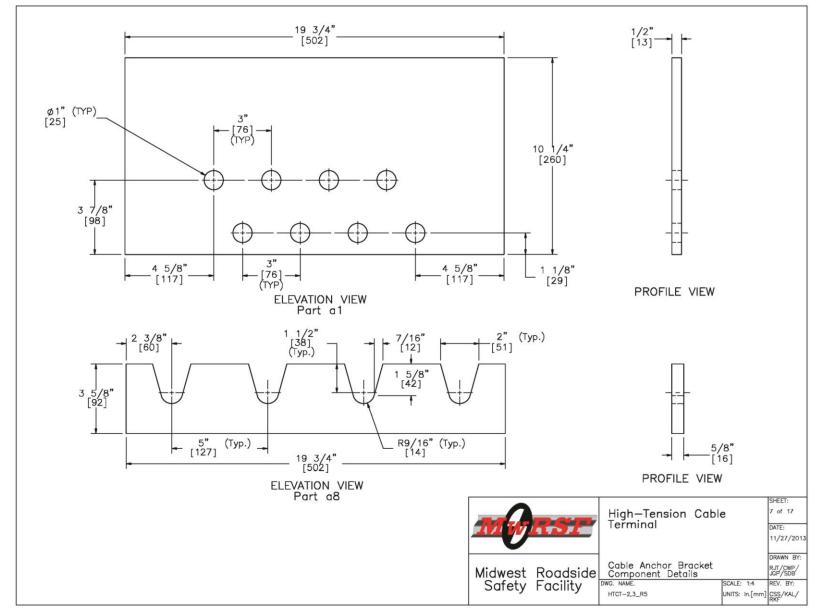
Cable Anchor Bracket Component Details, Test Nos. HTCT-2 and HTCT-3
